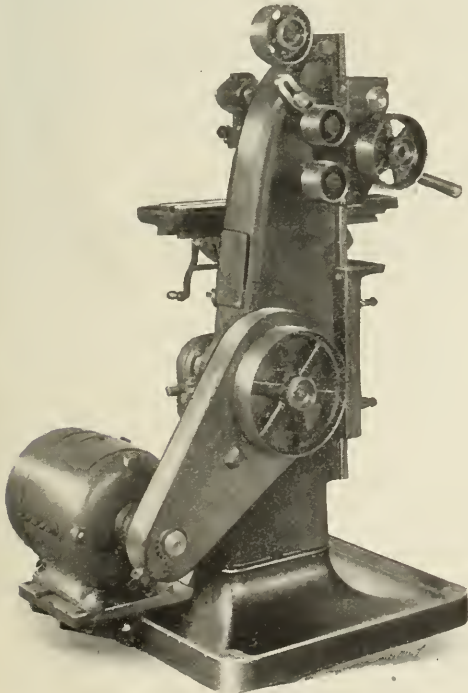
Superior Hand Milling Machine equipped with Motor Drive
